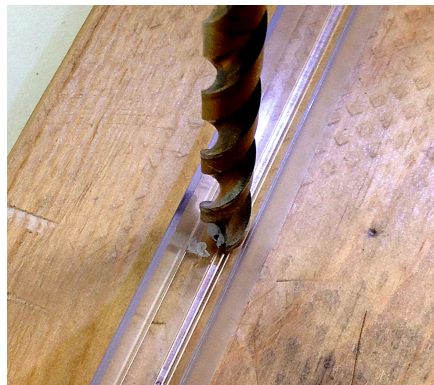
Drilling out the hole in the polycarbonate end-cap, for the hose barb, with a 5/16" drill bit.
